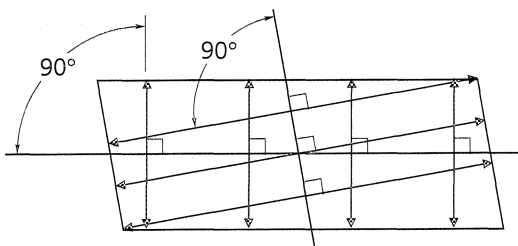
Measuring Orientation for Caliper Measurement. Illustration shows a rectangular part.
